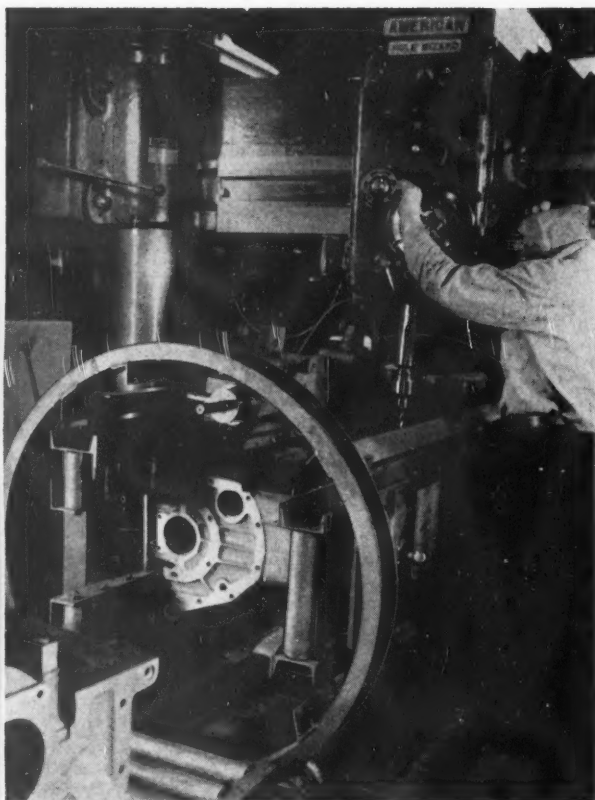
Dowel Holes in Crankcase are Drilled and Reamed with this Radial Drill, using a Turntable-Type Fixture
